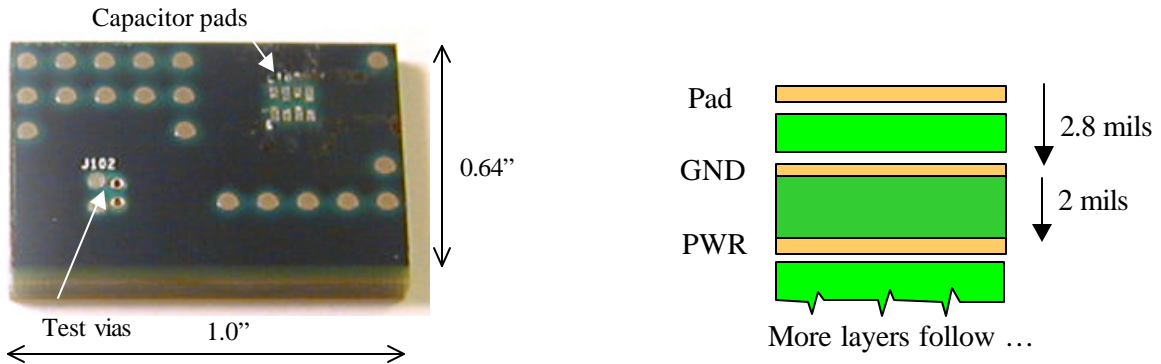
On the left: top view, dimensions and location of capacitor pads and test vias in Test Fixture D. On the right: cross section and vertical geometry of nearest planes in Test Fixture D
